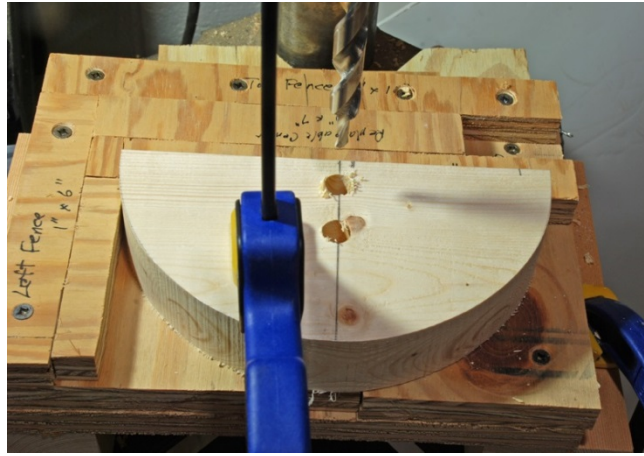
The Drilling Jig modified with additional Spacers for drilling two jaw sets.
